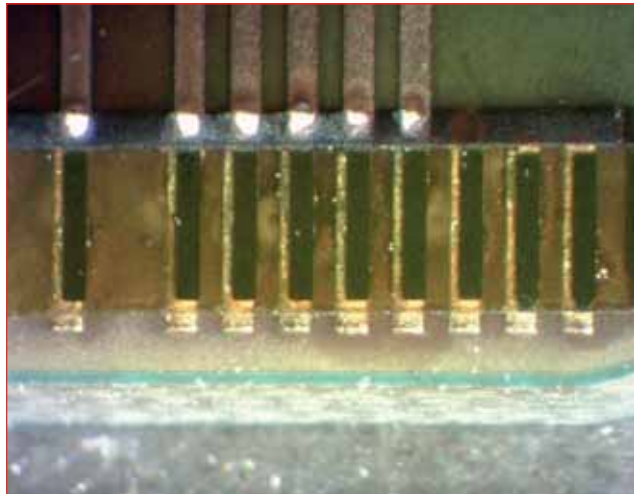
Fine-pitch selective reflow soldering FPC-PCB
